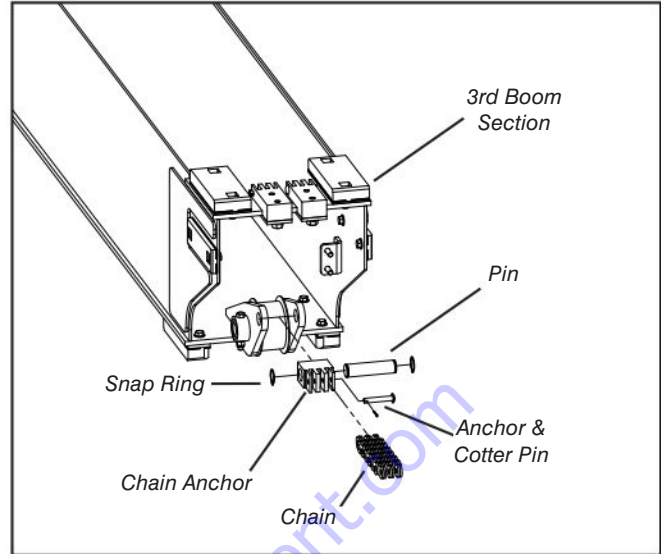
Rear Retract Chain Anchor 3rd boom section SJ1056 TH/THS // SJ1256 THS
